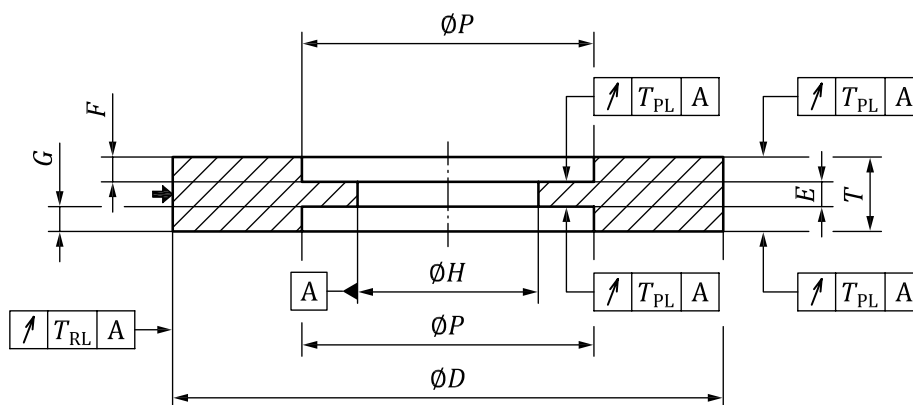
Grinding wheel, recessed on both sides (Type 7)
